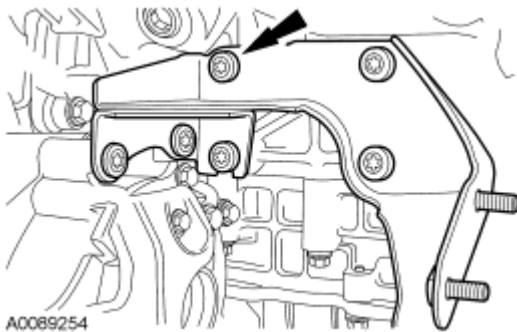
Locating Half Shaft Support Bracket & Bolts
